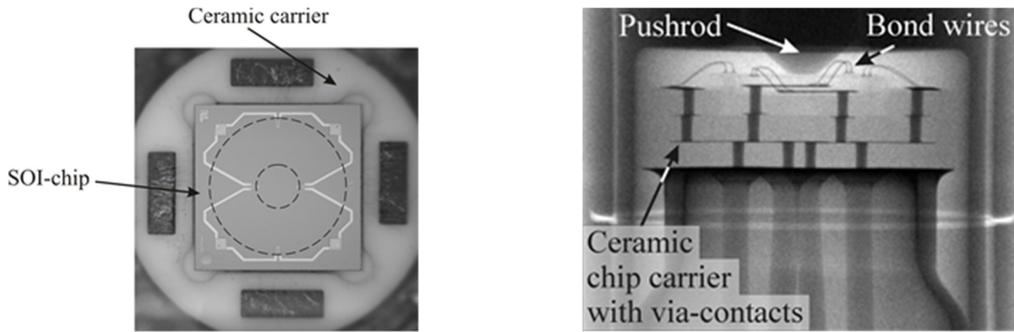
(a) Top view of SOI-pressure sensor chip placed in a ceramic carrier cavity; (b) X-ray photograph of the packaged sensor.
